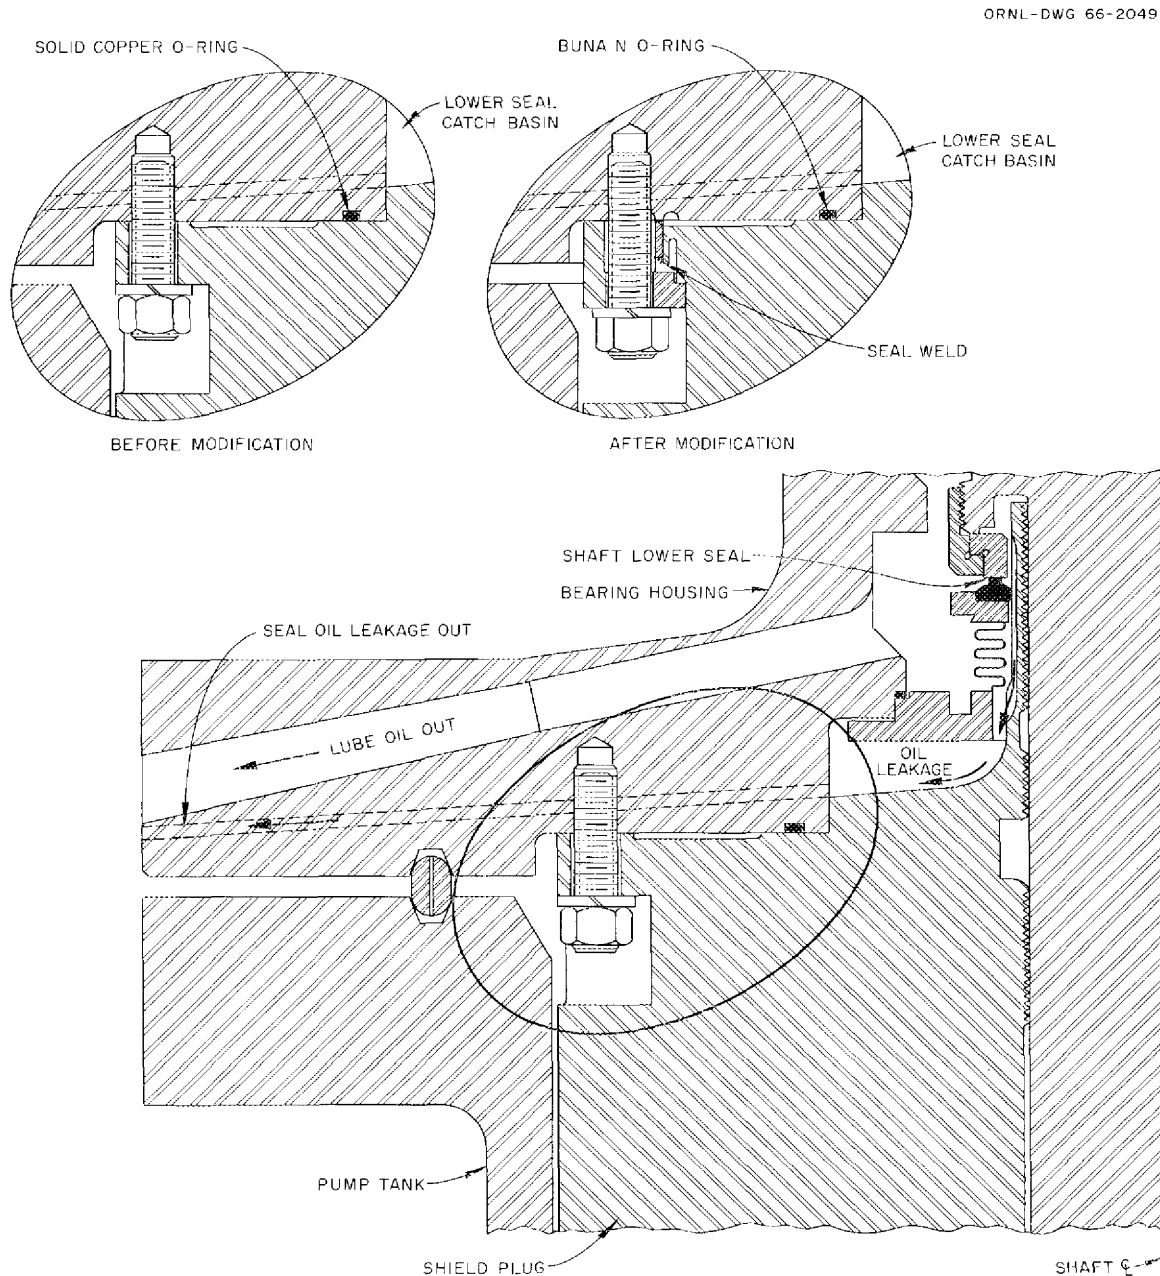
MSRE Salt Pump Rotary Element, Modification.
